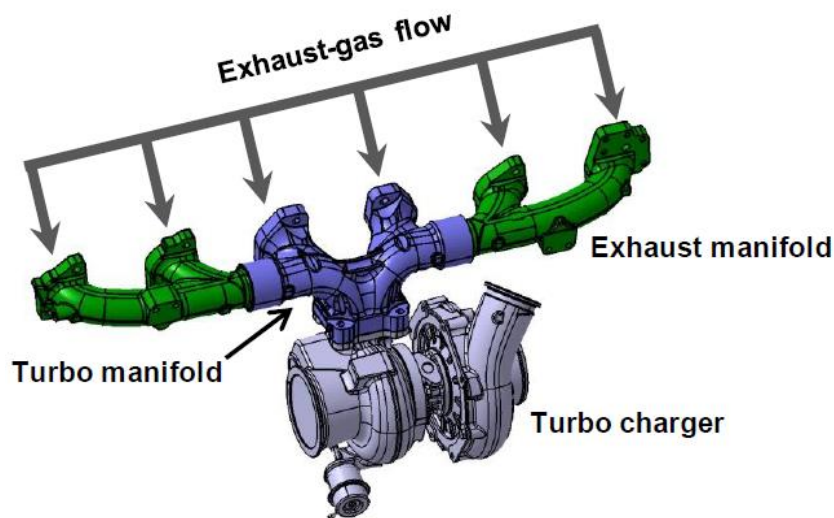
Turbo Manifold and the assembly view of the exhaust system.
